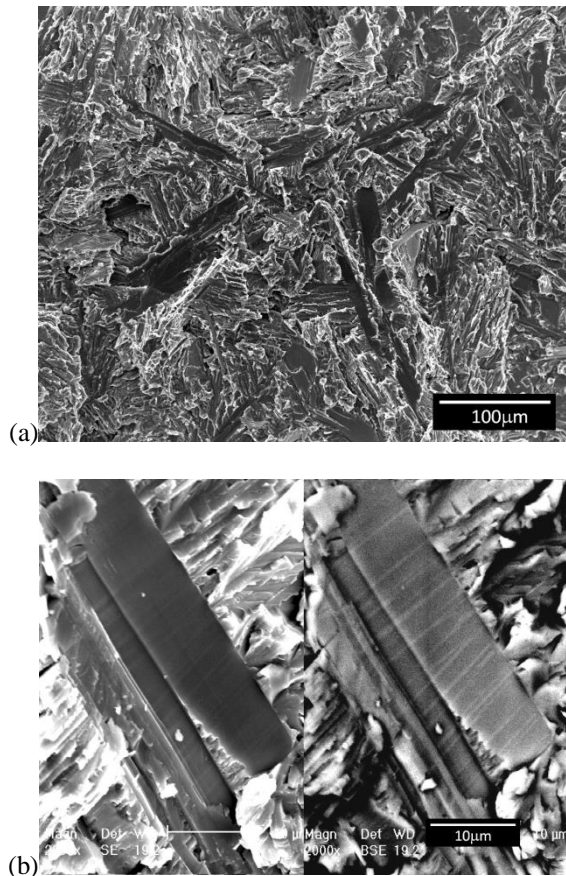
Fracture surfaces of cast (a) Ti44Al8Nb1B and (b) Ti45Al2Mn4Nb1B.
